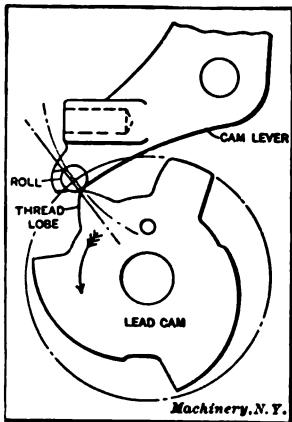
Position of Roll on Thread Lobe when Spindle is reversed
